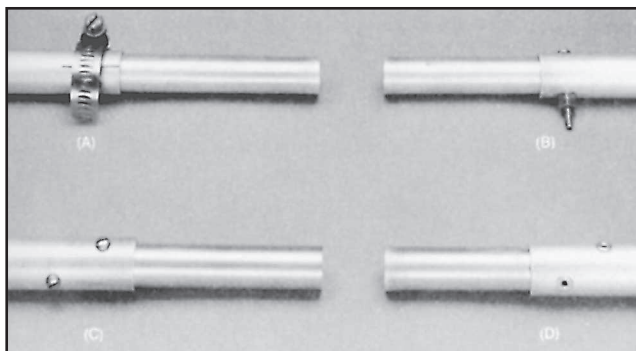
Methods of connecting telescoping tubing sections to build beam elements. See text for a discussion of each method.
